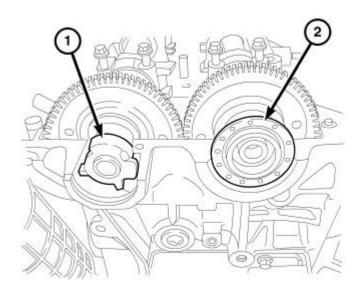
Camshaft Oil Seal Courtesy of CHRYSLER LLC
